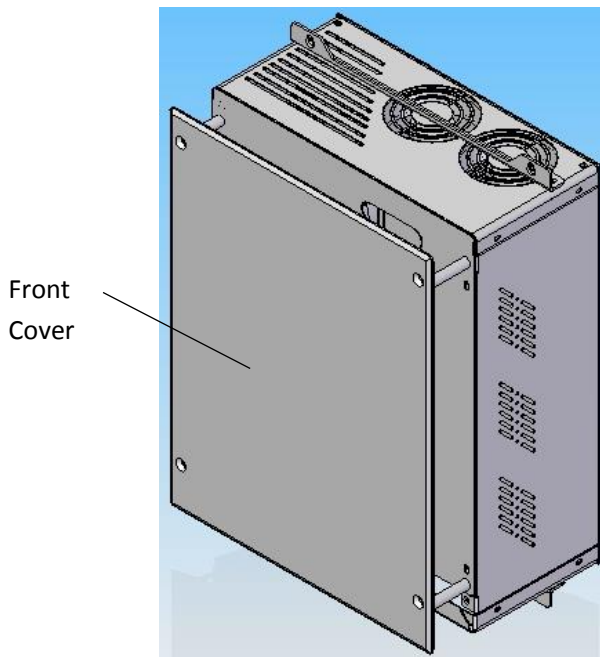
OPEN TYPE INSERTED INSTALL
